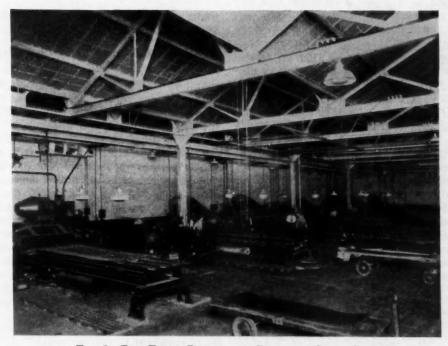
THE FINAL BUFFING OF STAINLESS-STEEL SHEETS
